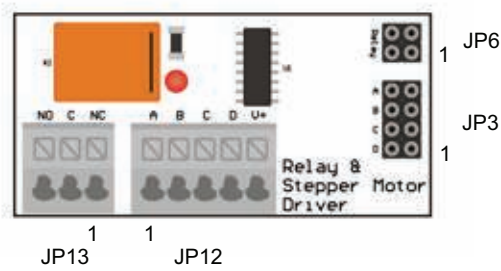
Stepper Motor Driver and Relay circuit component layout.
